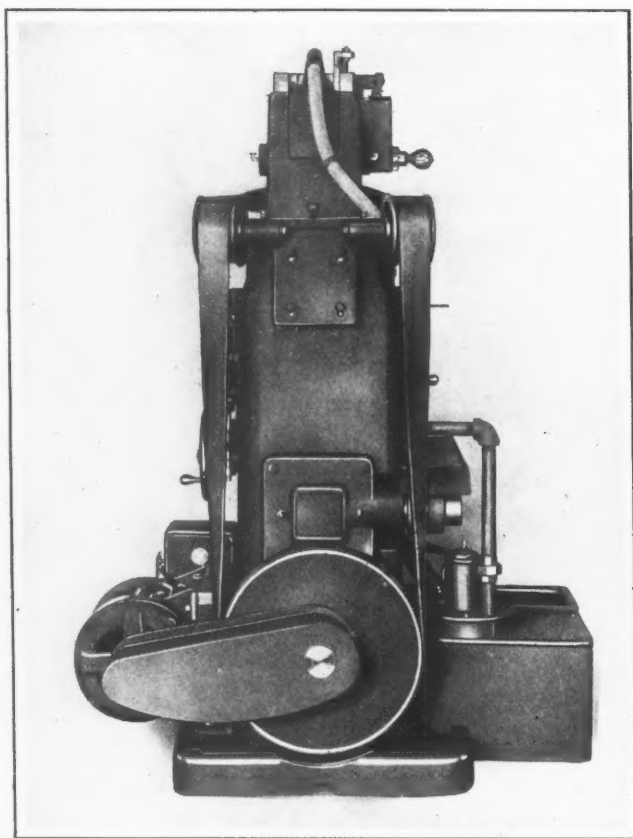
Rear View of a Walker Motor-driven Grinding Machine
